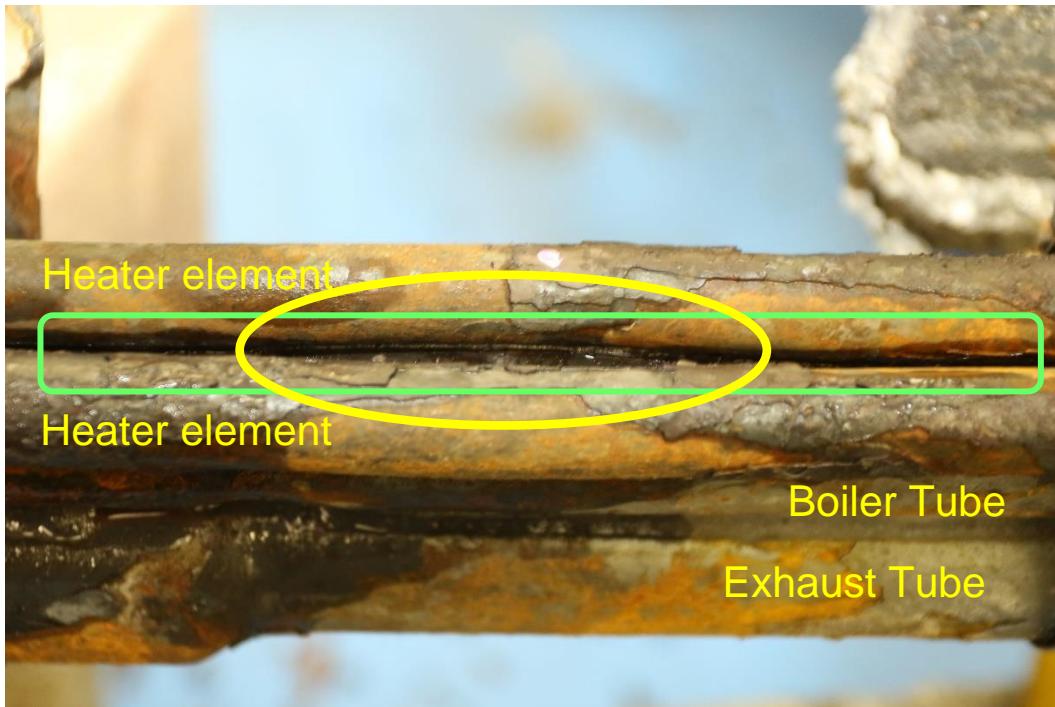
Item #1, photograph of the weld area of the subject boiler assembly. The welds are noted with a green box.
